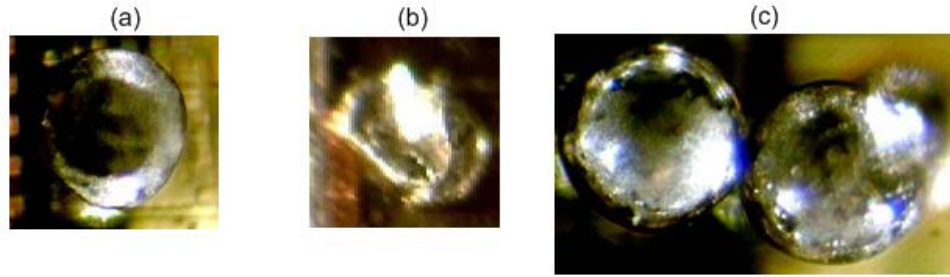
2D microscope view of solder ball defects – (a) Flat top, (b) Incomplete sphere, (c) Incorrect grid location
